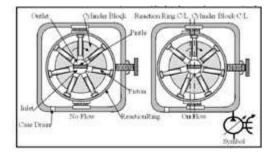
Cross-sectional view of radialpiston pump (check valve or eccentric type)
